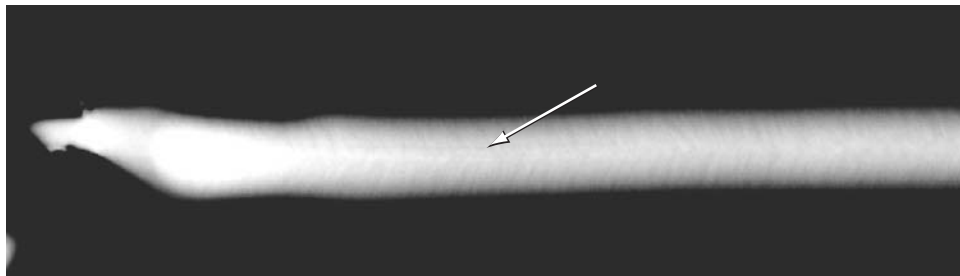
Radiograph of JT-08 taken at -10° off perpendicular. A faint enigma indication can be seen near the start of the weld joint. Weld direction is left to right.
